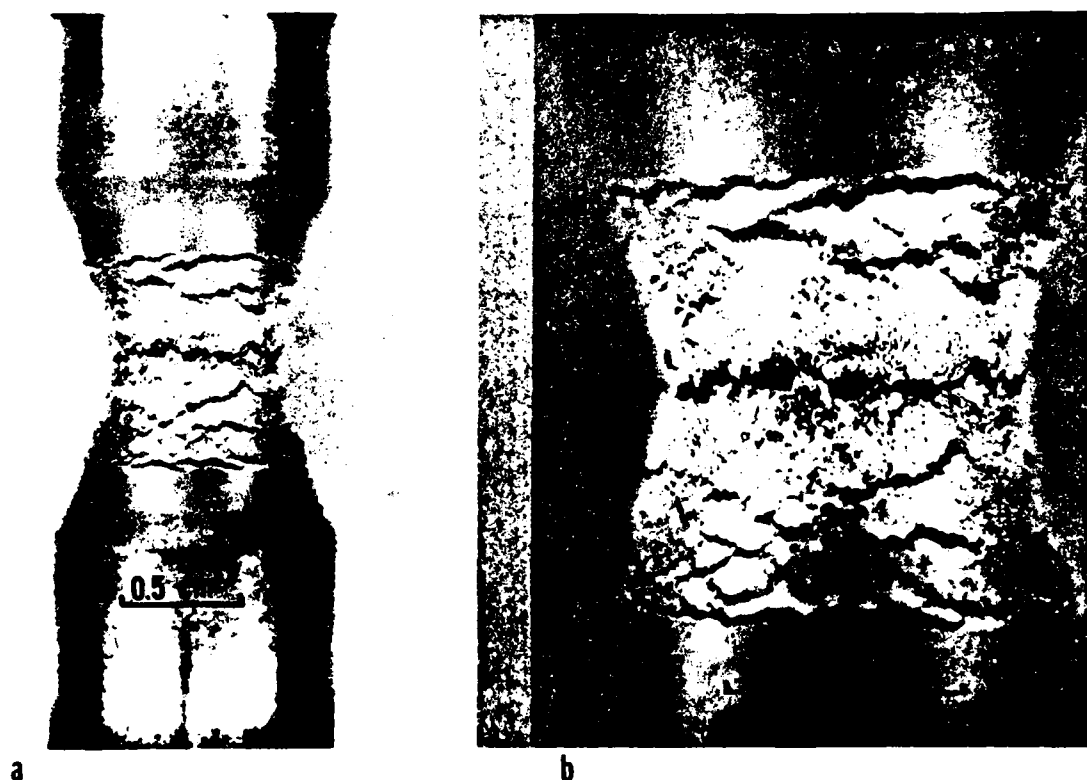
Photomicrographs of a sample of Cu-plated gun steel pulled at 1100°C in a Gleeble hot tensile machine.
